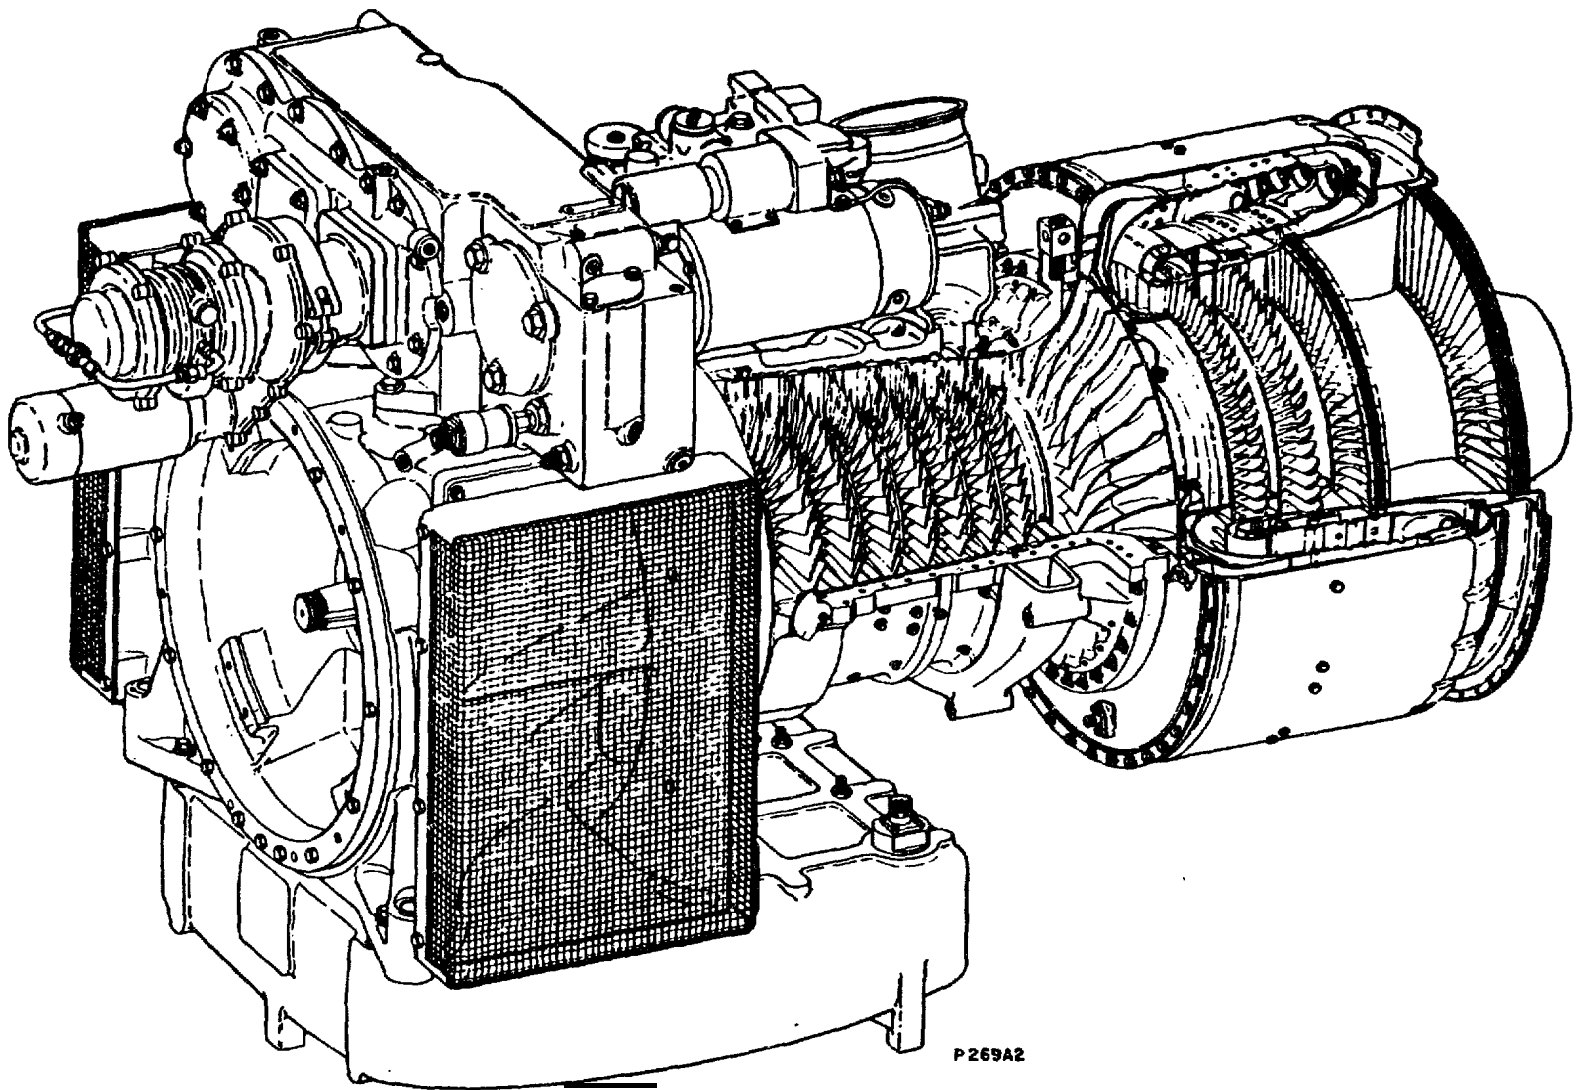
TF-25C TURBINE ENGINE ASSEMBLED
